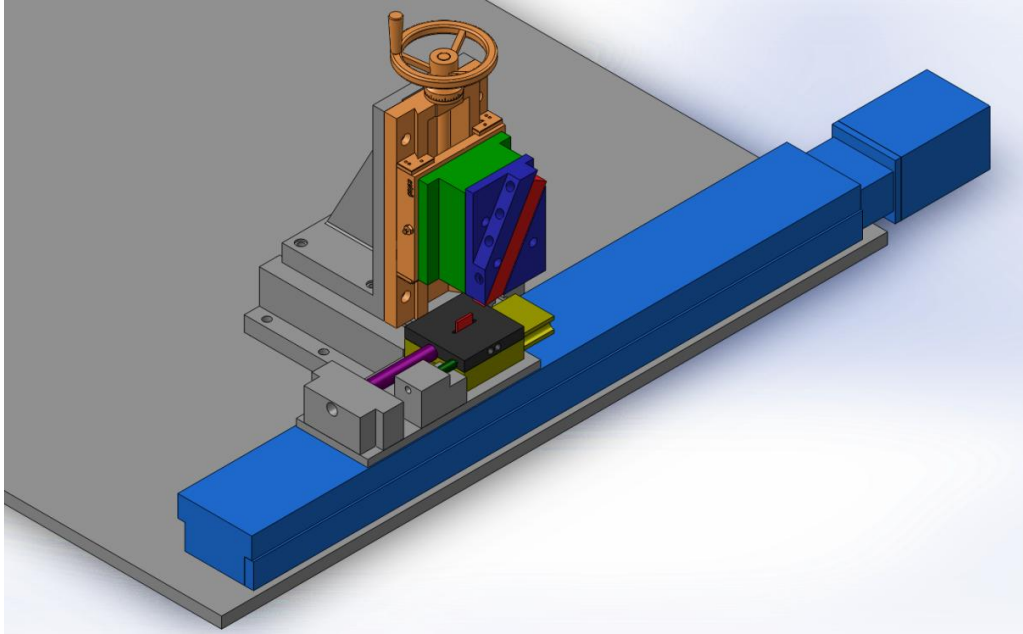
Solid model of computer-controlled planer. Components include linear stage (light blue), piezo-actuator (violet), capacitance probe (dark green), linear slide (yellow), work fixturing platform (black), workpiece and tool (red), tool holder (dark blue), force transducer (light green), vertical stage (tan).
